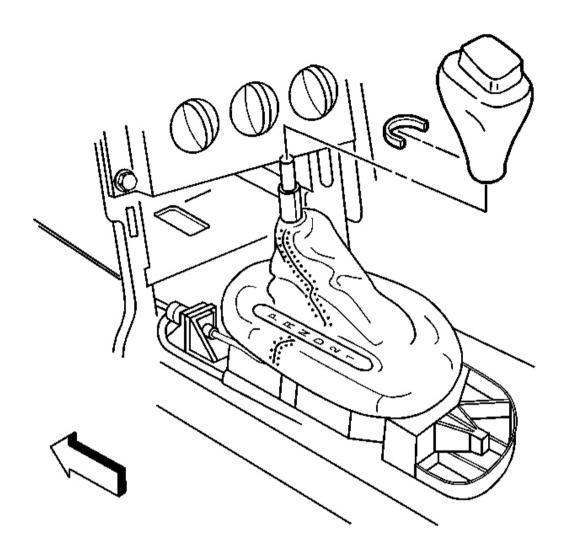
Floor Shift Control Knob & I/P Accessory Trim Plate Courtesy of GENERAL MOTORS CORP.
